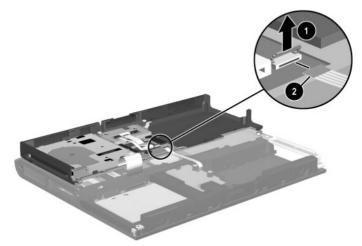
Disconnecting the Keyboard-to-TouchPad Cable
